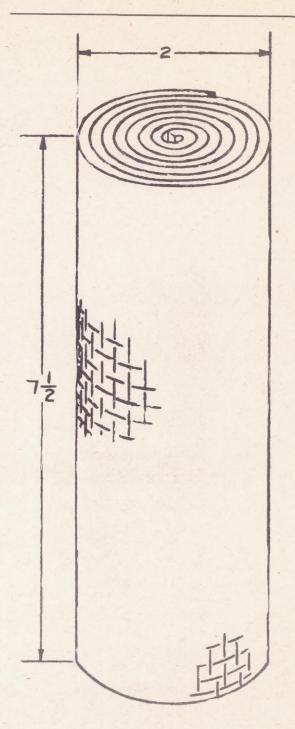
Nominal dimensions of tensile and compressive specimens.
